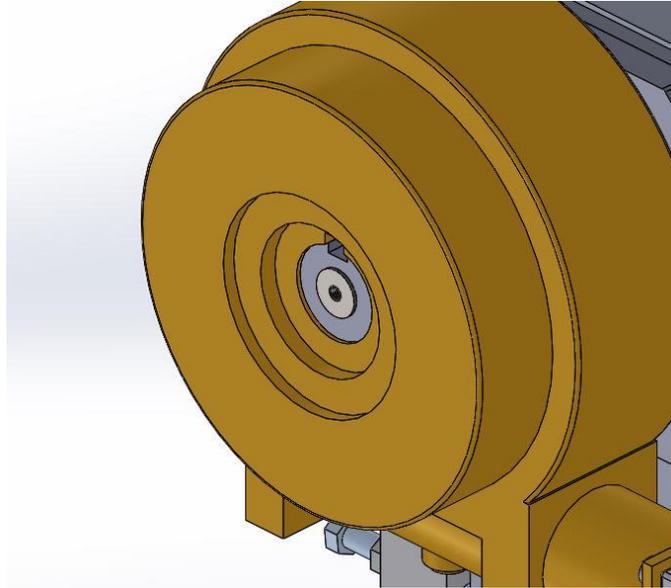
Final Drive End Design, Hydraulic Gearbox, Internal Stepped Geometry
